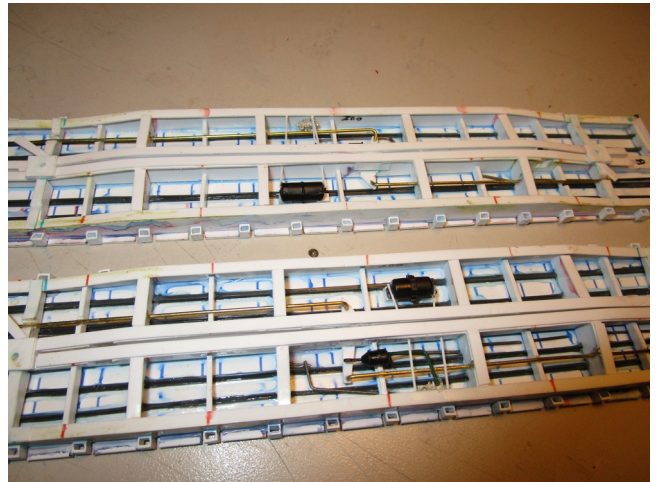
assembling all of the brake gear castings and connecting them with brass rods.
